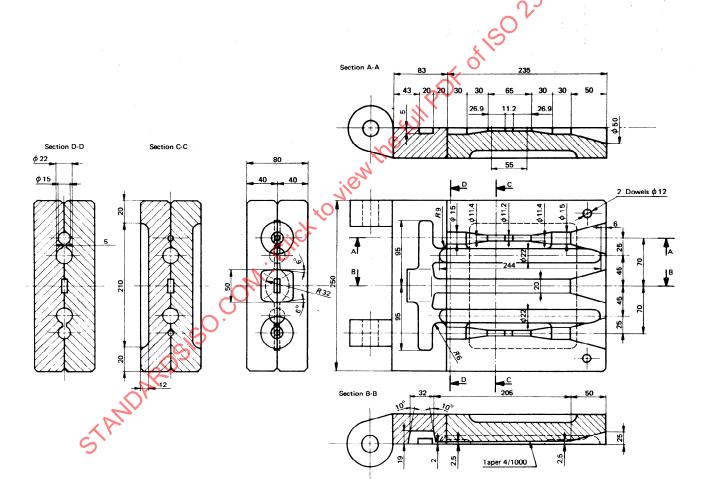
Mould for reference test bars — Dimensions in millimetres
